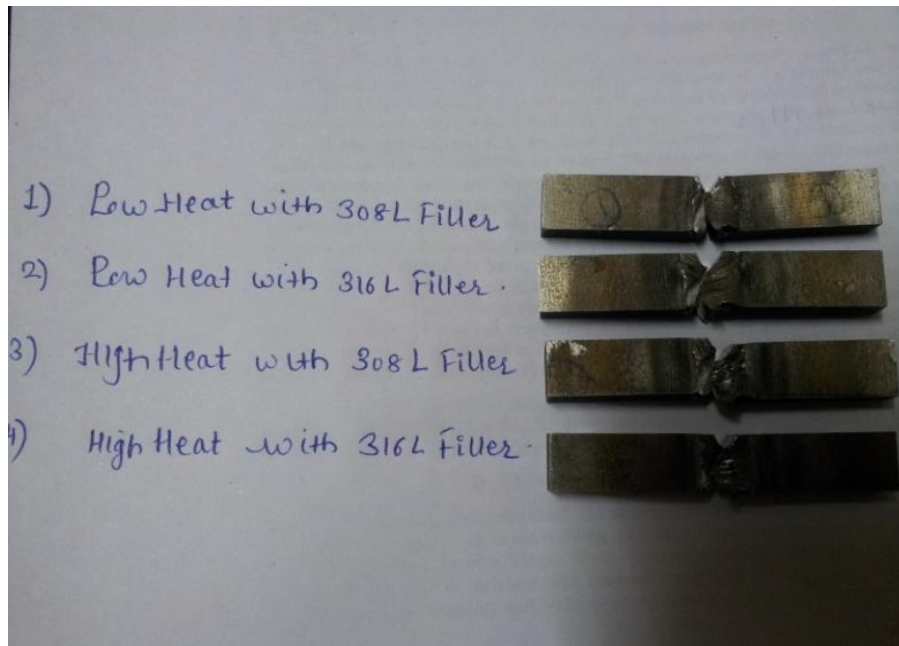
Actual photo of transverse tensile tested specimens showing the location of fracture (filler used AISI 308L, 316L SS)
